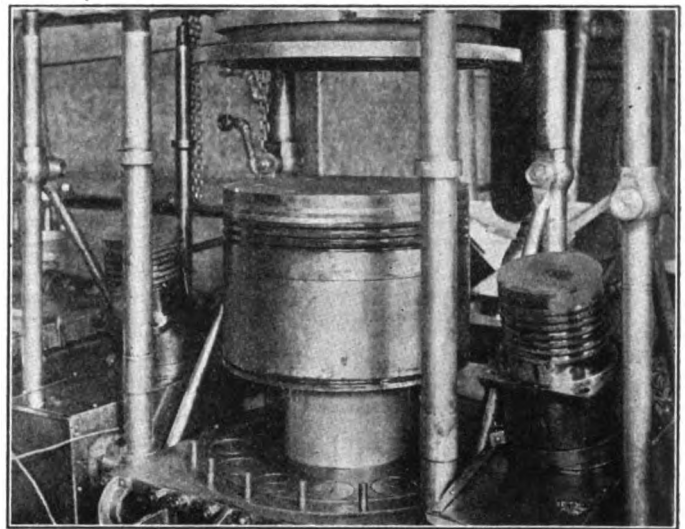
VIEW OF THE ENGINE ILLUSTRATED IN FIG. 26 DISMANTLED, SHOWING THE TWO HIGH-PRESSURE PISTONS, THE LOW-PRESSURE PISTON AND THE TRUNK EXTENSION
